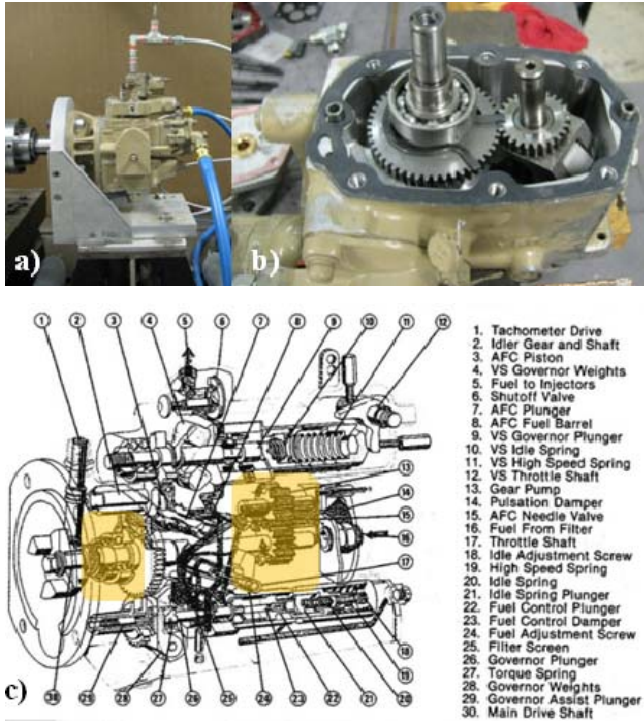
a) PT pump assembled; b) Partial disassembled; c) Schematic
